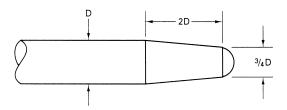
A typical tungsten electrode shape grounded for AC-GTAW aluminum welding, having a hemispherical-shaped tip [Ref. 2]
